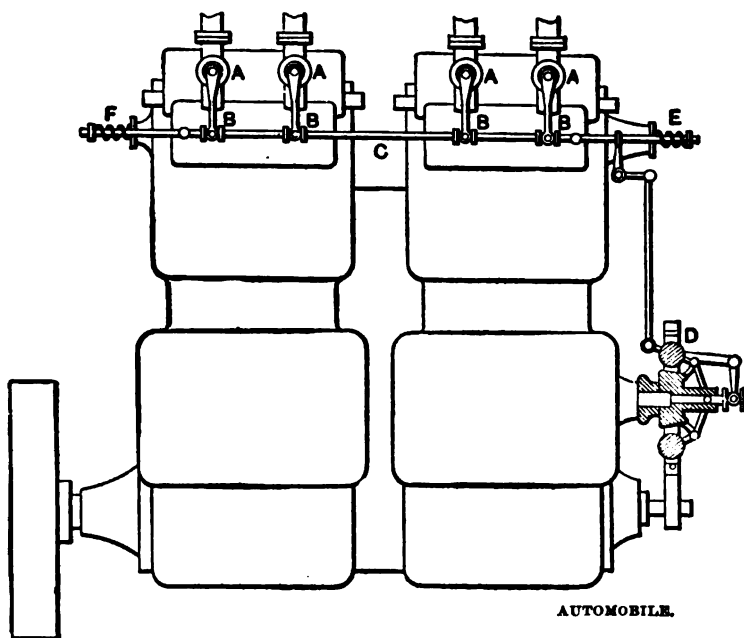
Diagram of Volume Throttling Device on the Mors Engine. A and A are throttle valves on the inlet pipes; B and B, valve levers; C, valve shaft, under control of the governor, D; E and F, springs, used either singly or together, according to control, so as to vary the opening of the inlet. System like the Duryea.
